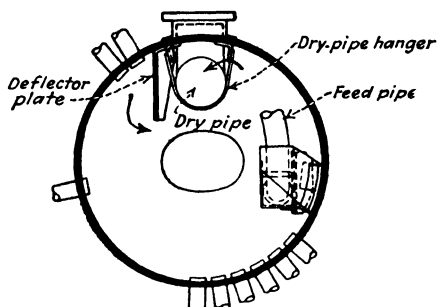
Dry pipe and baffle in bent-tube boilers. (*Combustion Engineering Company.*)
